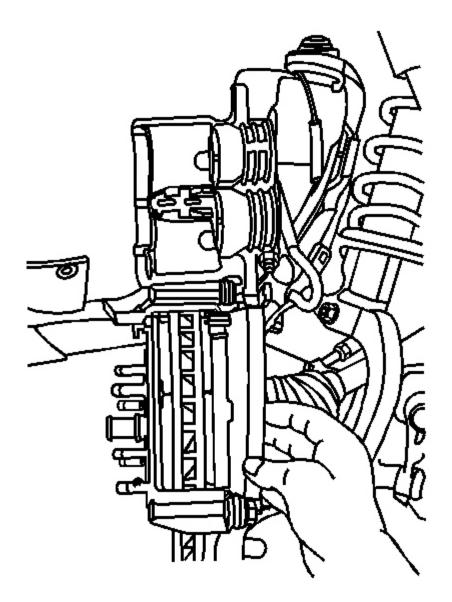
View Of Caliper & Related Components Courtesy of GENERAL MOTORS CORP.
